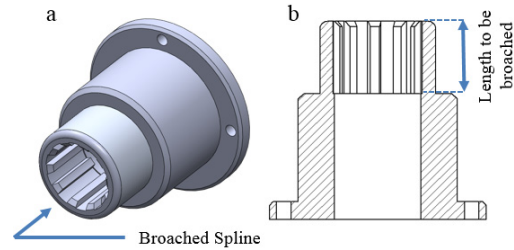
Geometry of the coupling to be broached; (a) Isometric View; (b) Section View
